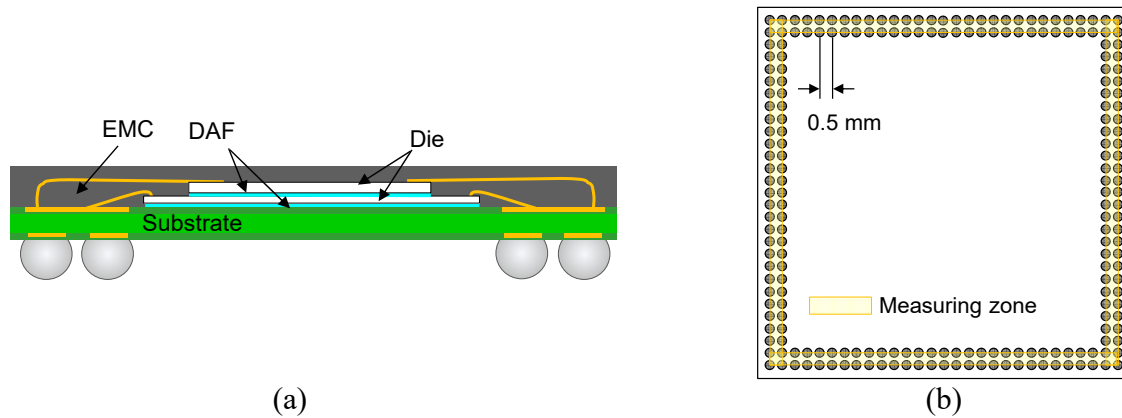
TFBGA package: (a) cross-sectional view and (b) bottom view showing the measuring zone
